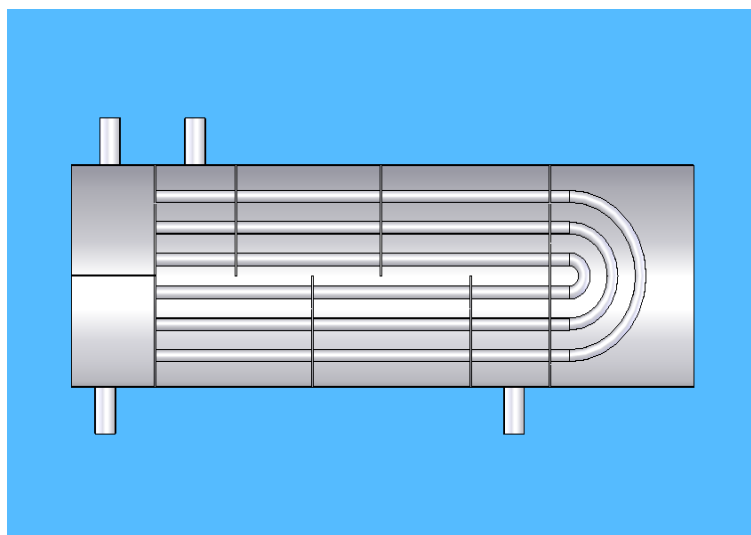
Design of shell-and-tube heat exchanger in Solidworks
